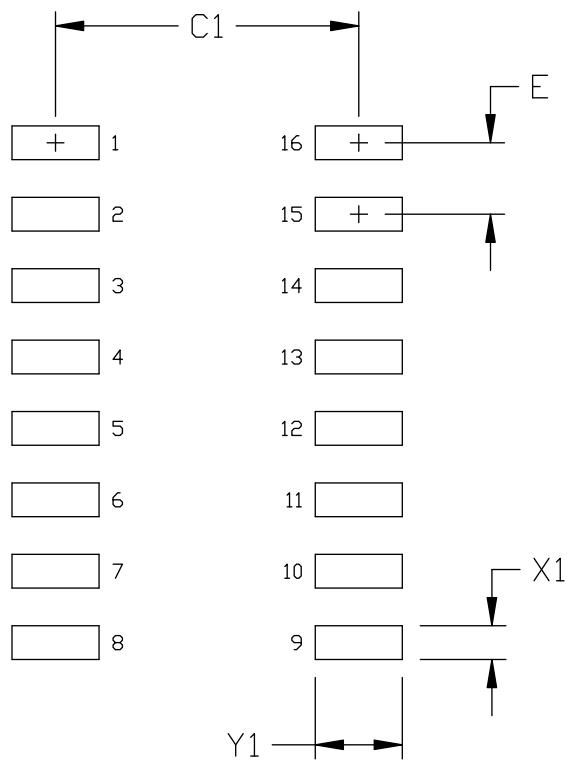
SOIC16 PCB Land Pattern Drawing
